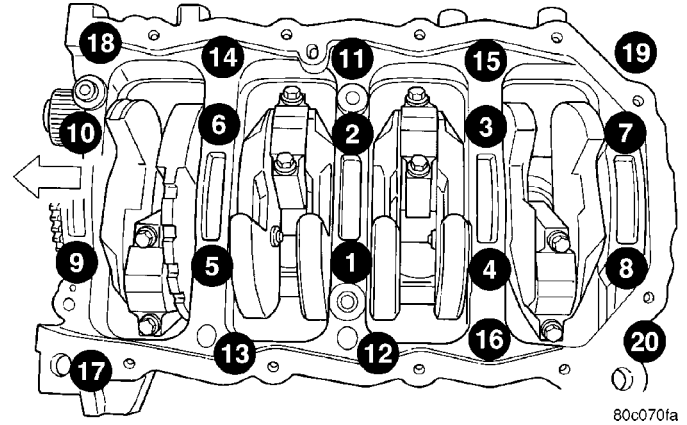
Main Bearing Caps/Bedplate Tightening Sequence
